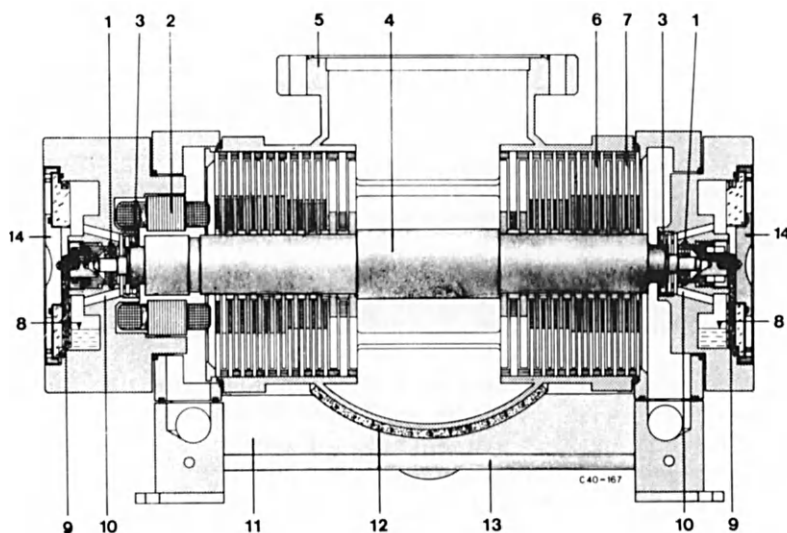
Section diagram of a turbomolecular pump based on the design of Becker¹³. 1, Bearing; 2, motor; 3, labyrinth chamber; 4, rotor; 5, UHV connection; 6, rotor vane; 7, stator vane; 8, oil reservoir; 9, oil supply for bearing; 10, oil return; 11, backing pressure channel; 12, heater; 13, water cooling; 14, seal. (Courtesy Balzers High Vacuum Ltd)
